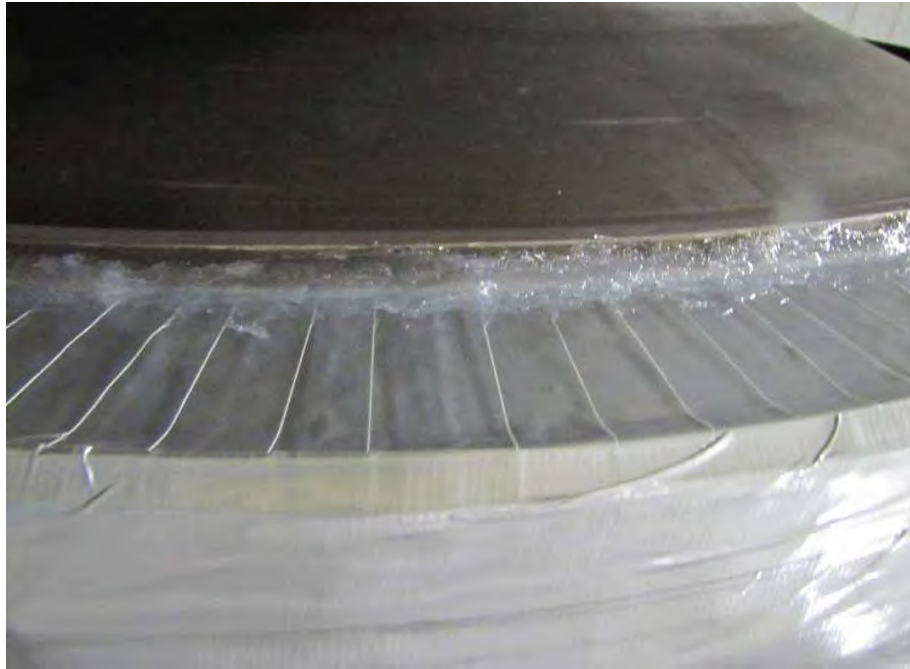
Close-up of protective tape on fractured L-1 disk rim.
